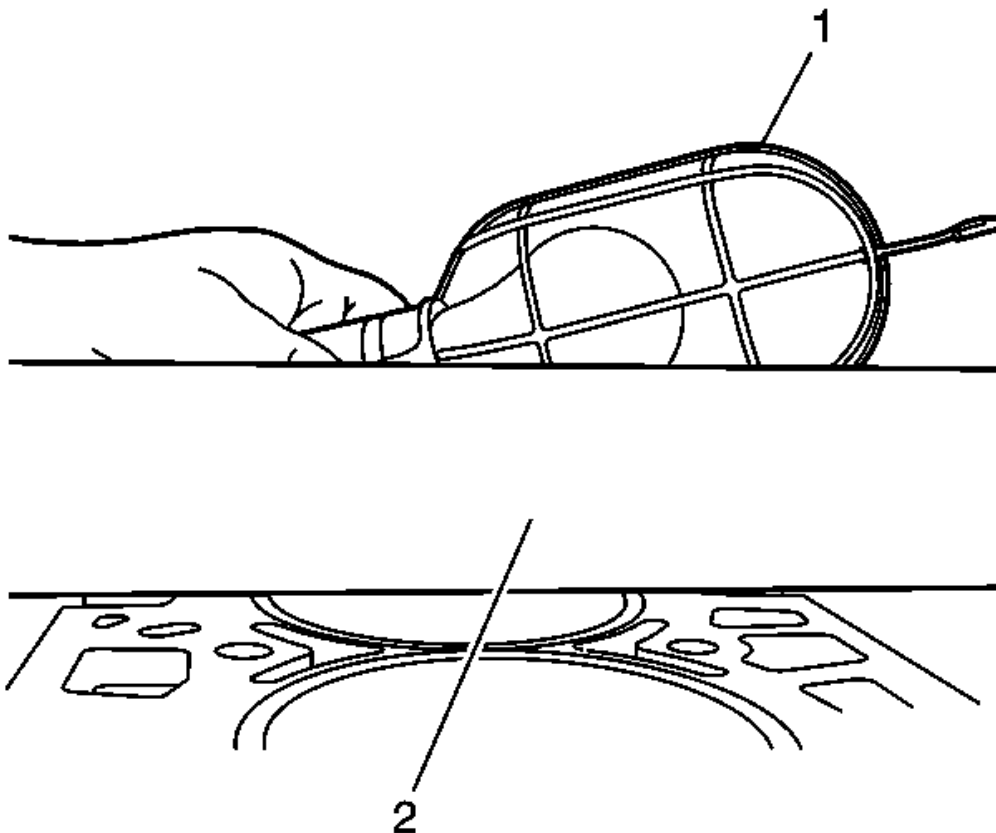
Using A Light To Illuminate The Backside Of The Straight Edge
